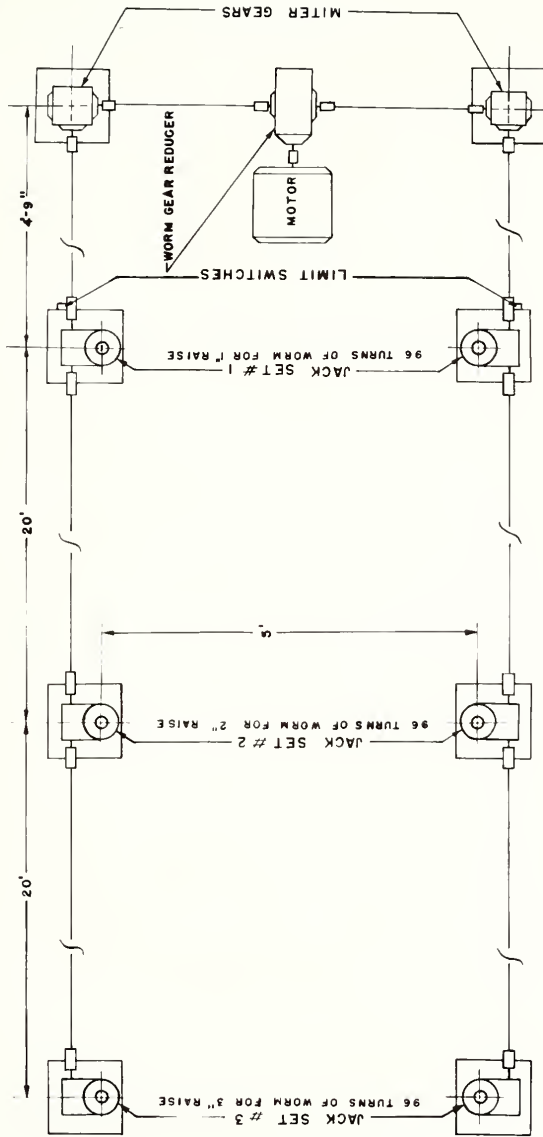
PLAN VIEW OF JACKS AND GEARS
